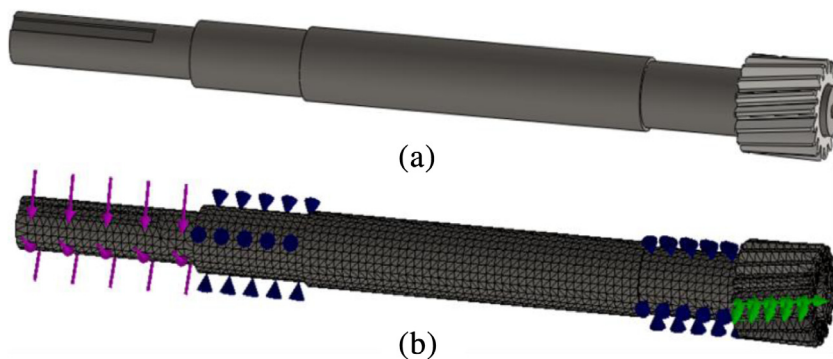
Pinion shaft assembly: (a) 3D CAD model, (b) Meshed model with loads and fixtures.
